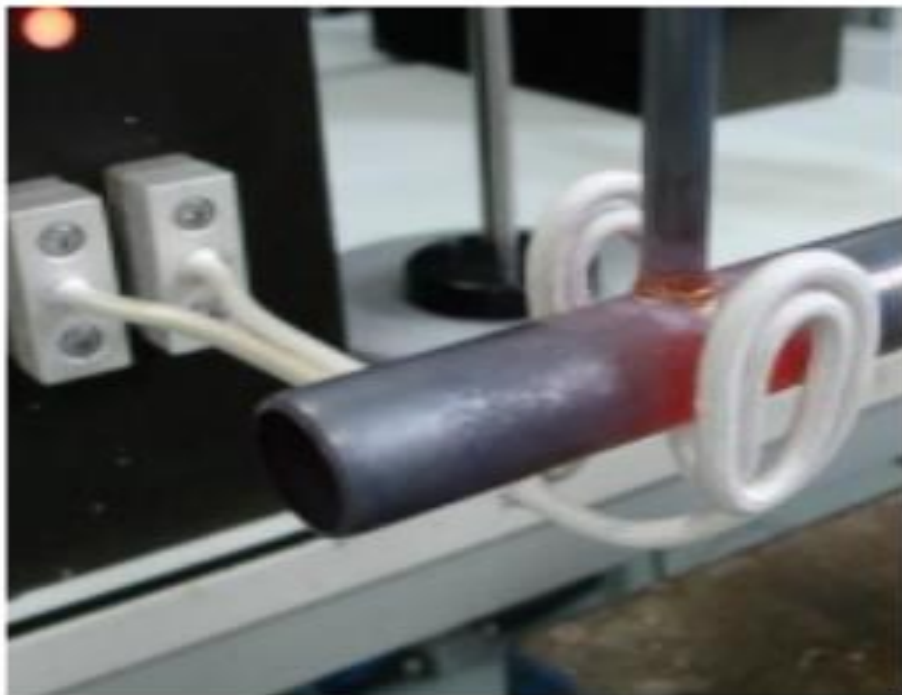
Welding of two metal parts by induction.[20]
